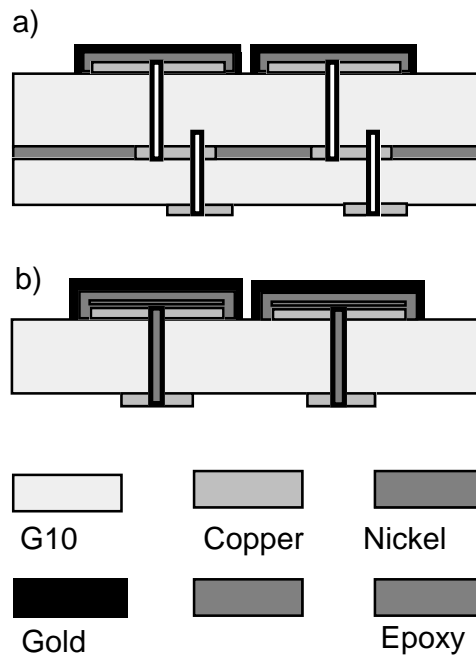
Schematic cross-sections of the pad PCB: a) version without through holes; b) version with through holes.
